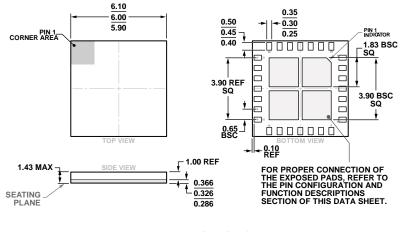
28-Terminal Land Grid Array [LGA] (CC-28-3) Dimensions shown in millimeters
